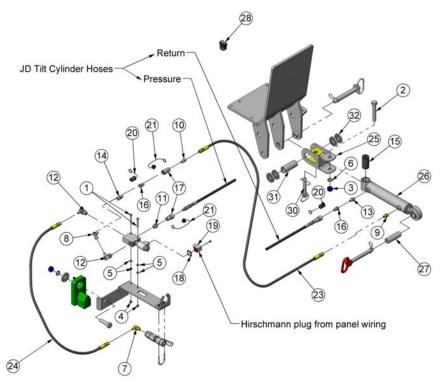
Hydraulic Tilt Cylinder - Exploded View
